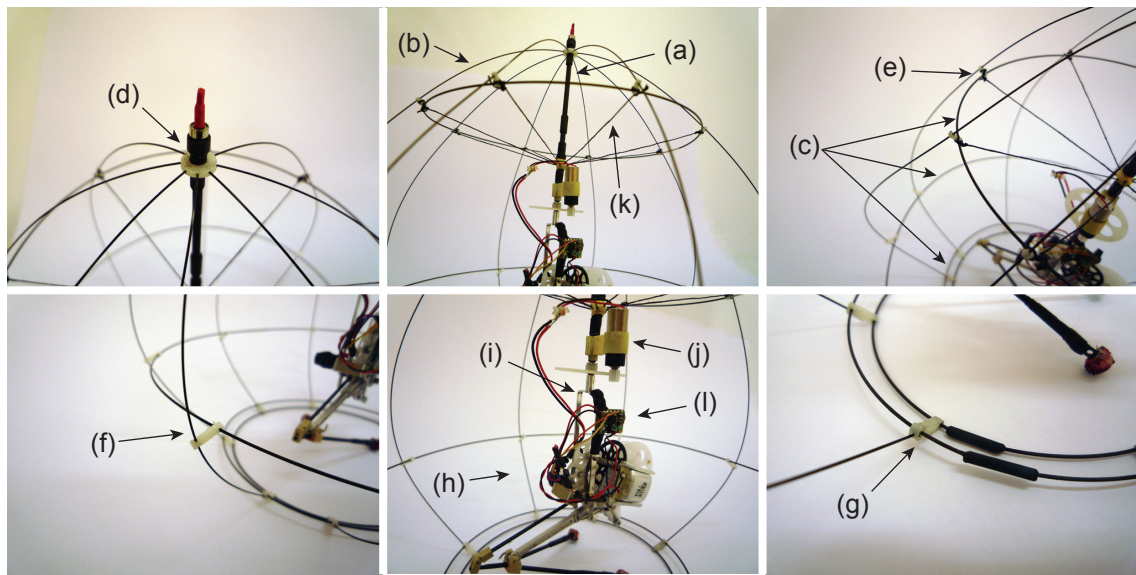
Mechanical design details of the EPFL jumper v3. (a) axis of the robot, (b) 0.5mm carbon rods, (c) 0.7mm carbon ring, (d), (e), (f), (g) connection pieces to hold the carbon ring and carbon rods together, (h) jumping mechanism as propulsion unit of the robot, (i) aluminum fork to interface the axis of the robot to the jumping mechanism, (j) 6mm DC pager motor to rotate the jumping mechanism around the axis, (k) wires to reinforce the cage structure, (l) 3-channel remote control
